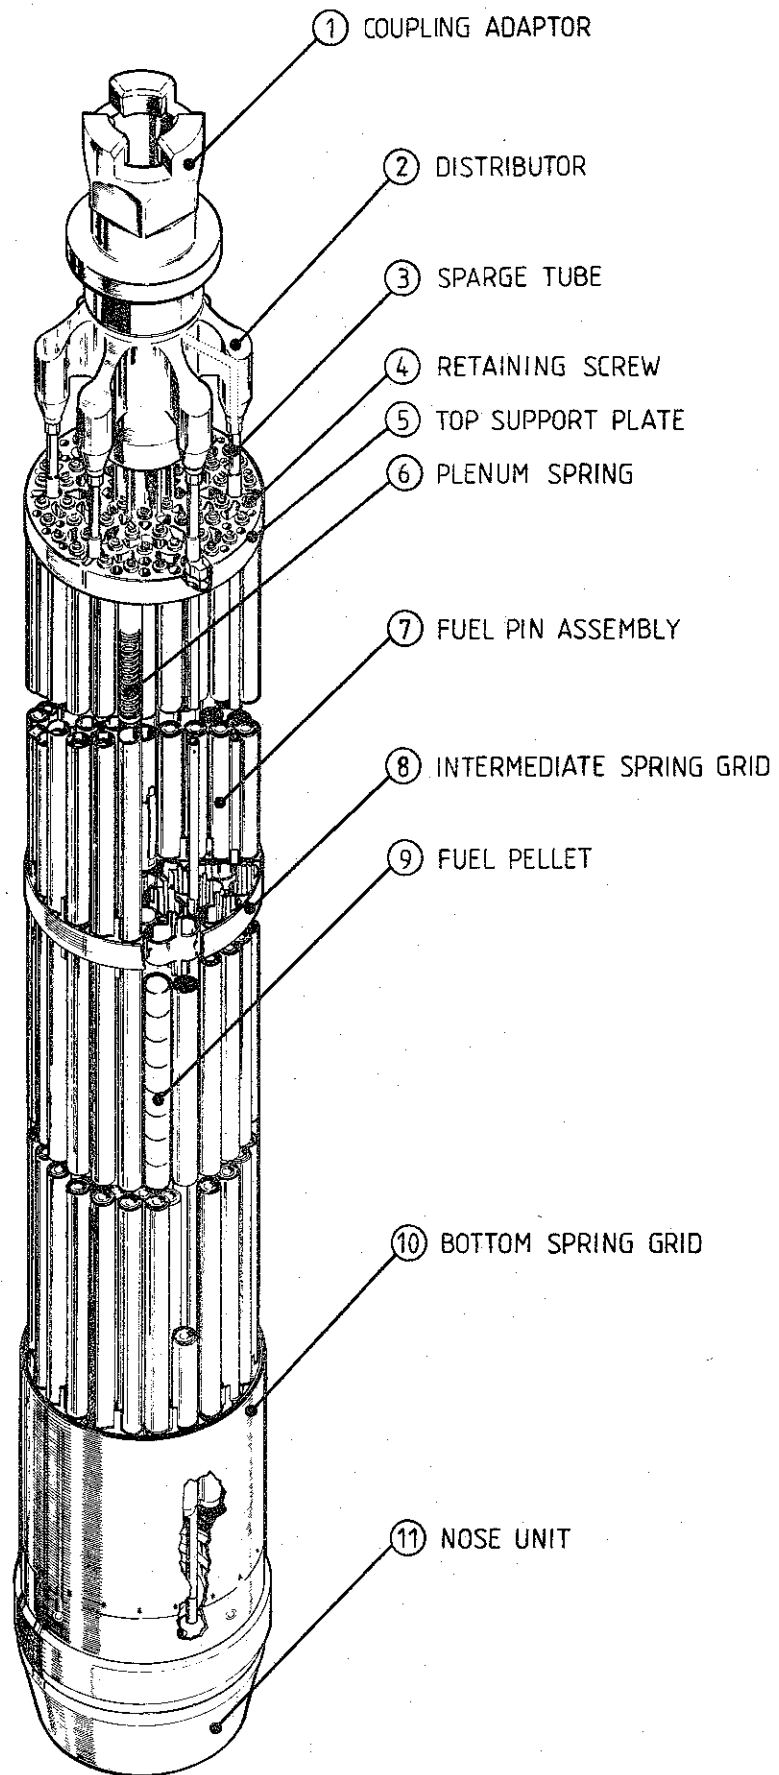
60 PIN SPRING GRID SGHWR FUEL ELEMENT
